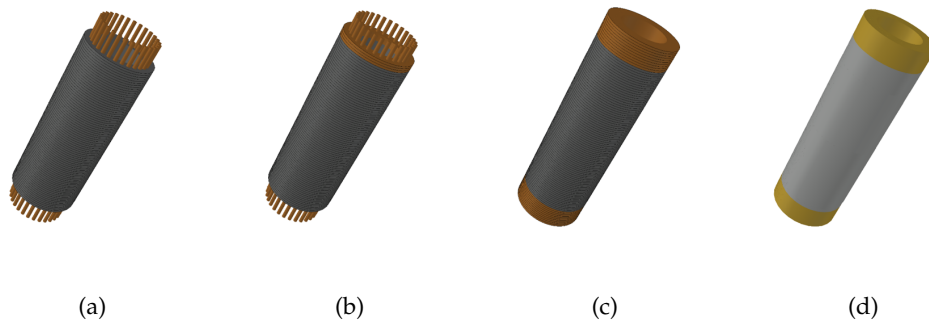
Rotor assembly of a deep well submersible motor: copper bars with ferromagnetic laminations (a); some (b) and all (c) of the copper sheets of the end-ring and its final copper liquid soldering plus the paint coating (d).
